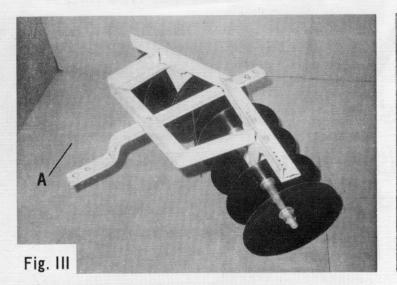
Fig. III shows Assembly of front Disk Harrow when used on Tractors equipped with Slot Type Hitch or Drawbar mountings. Note: Hitch Bar (A) should be turned over for mounting to higher Slot Type Hitches or Drawbars.
